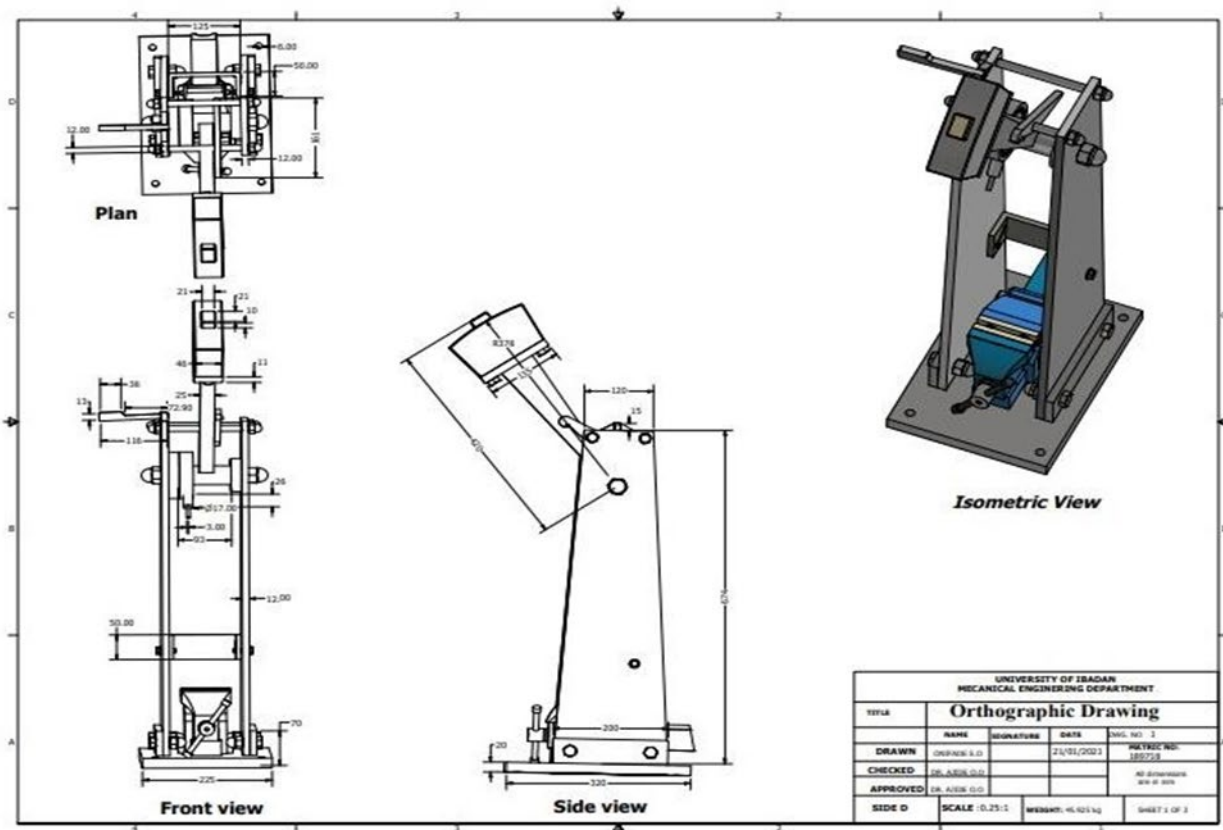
Orthographic views of Impact Fracture Tester
